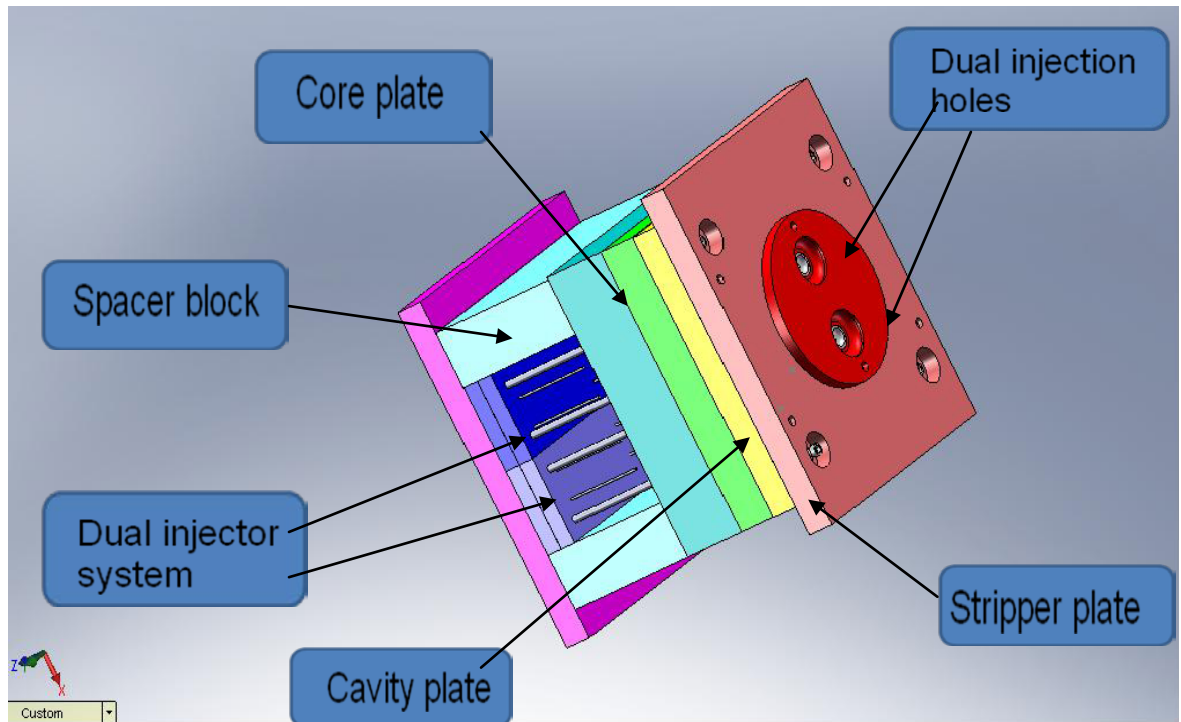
Complete Mold Design for plastic Injection molding two colors
